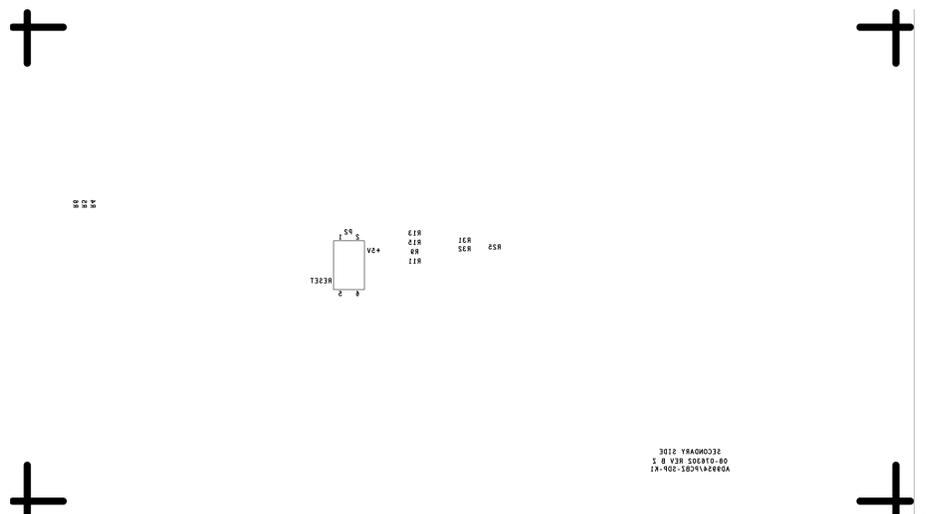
AD9954/PCBZ-SDP-K1 Schematic, Bottom Side Silkscreen
